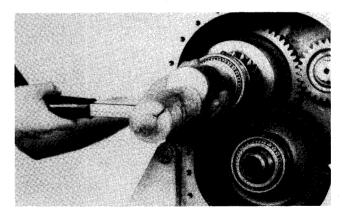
Install low (1st) clutch outer double taper bearing. NOTE: Locating ring groove in bearing cup to be out (to the rear).
